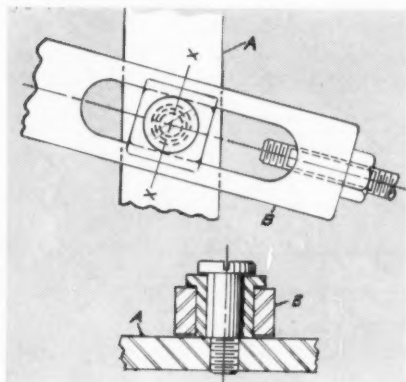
This sketch shows a T-shaped shoe in which the flanges located at the top act as guides. The body of the shoe is rectangular.
